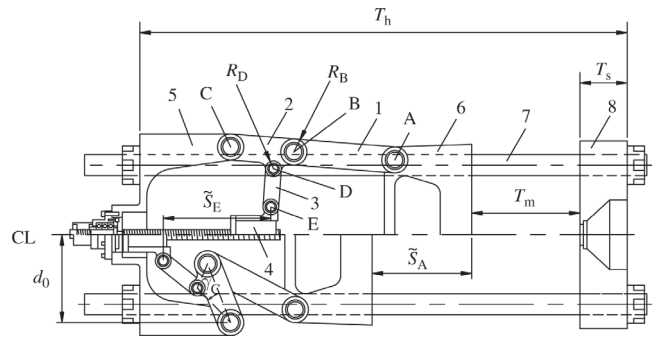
Conventional five-point double-toggle mould clamping mechanism
